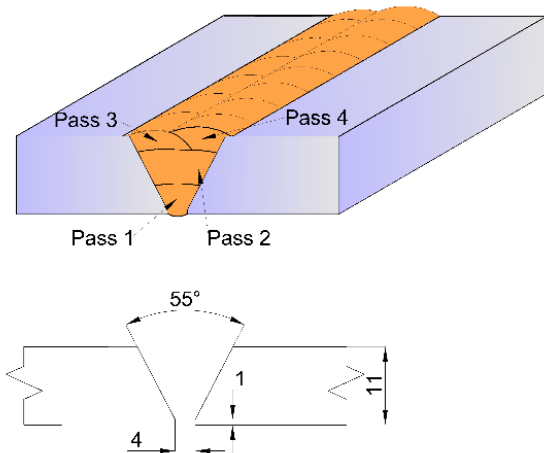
Schematic representation of a welded joint and pass position
